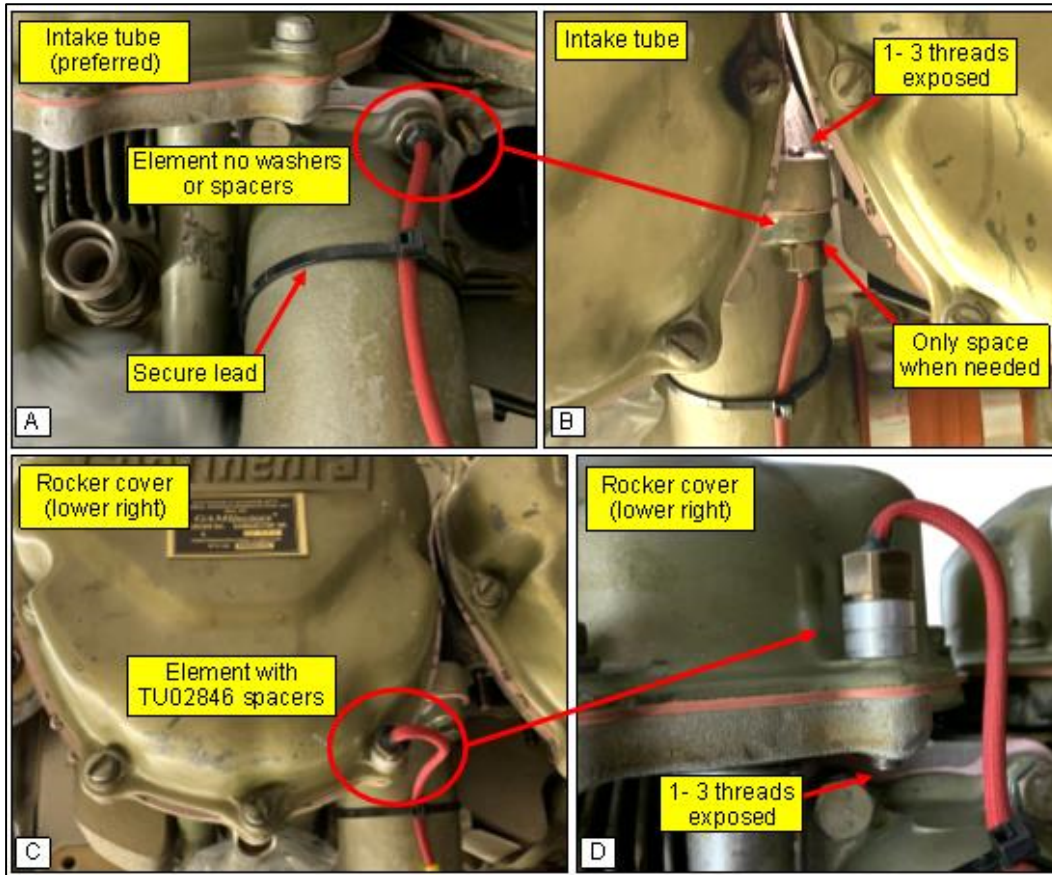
Continental large bore angled valve cylinder head w/ D style rocker cover: 470, 520, and 550.
